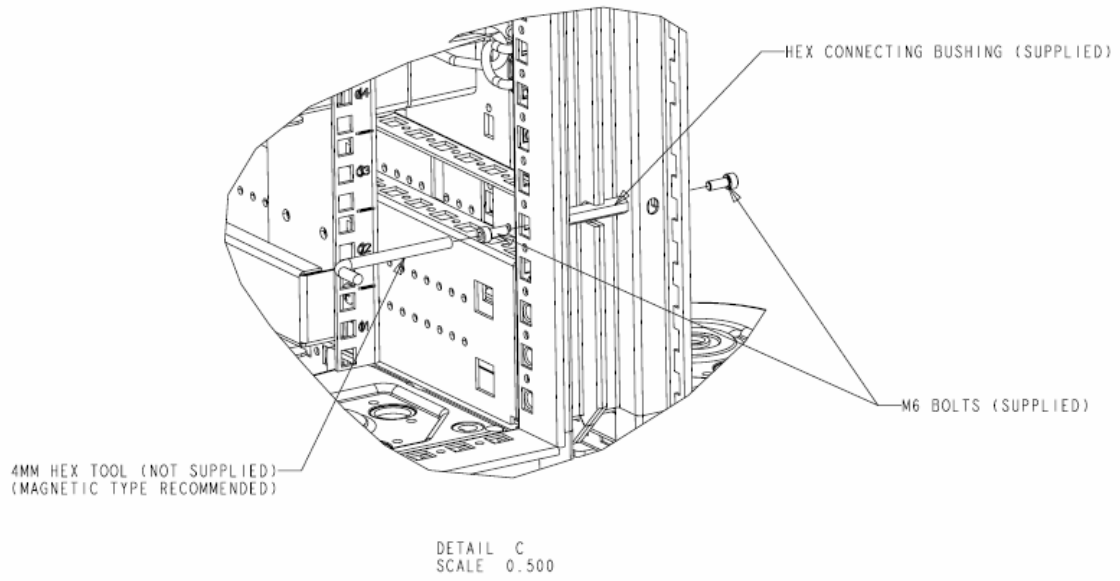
Rear Baying Instructions [Detail C] - 2 of 2
